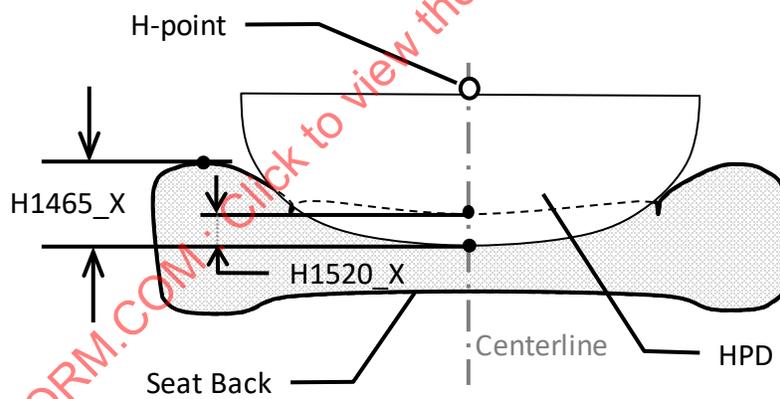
C - HPD-specific seat back lateral cross-section dimensions
